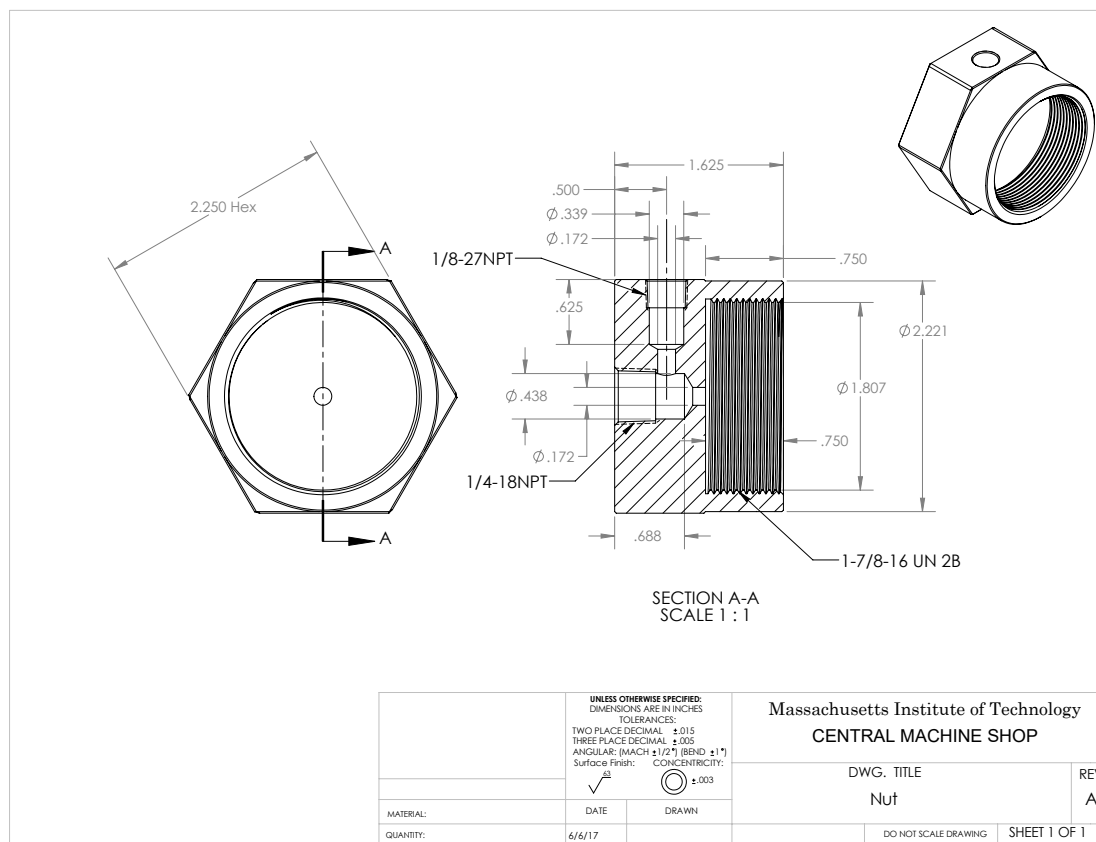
Schematic drawing of the nut part of the steel pressure reactor.
